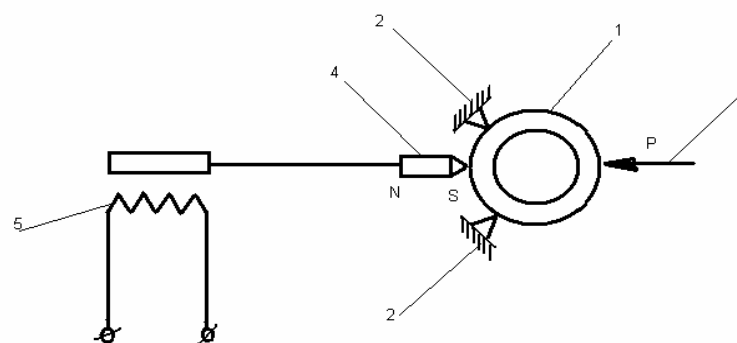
The schema of the austenite-meter: 1 – bear ring; 2 – fixing support; 3 – constant pushing force; 4 – permanent magnet; 5 – electro-magnet.
